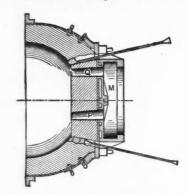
HOLLEY'S EXTERNALLY RAMMED BOTTOM-JOINT-OLD STYLE.
